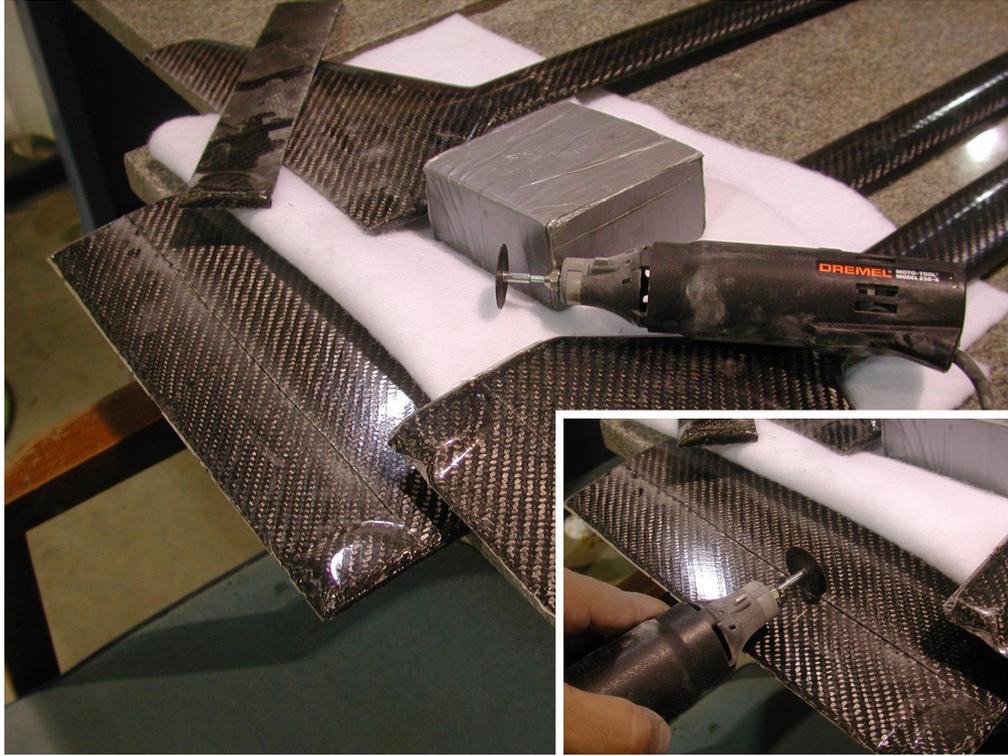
Rudder Cutout – free hand cutting, detail view bottom right.
